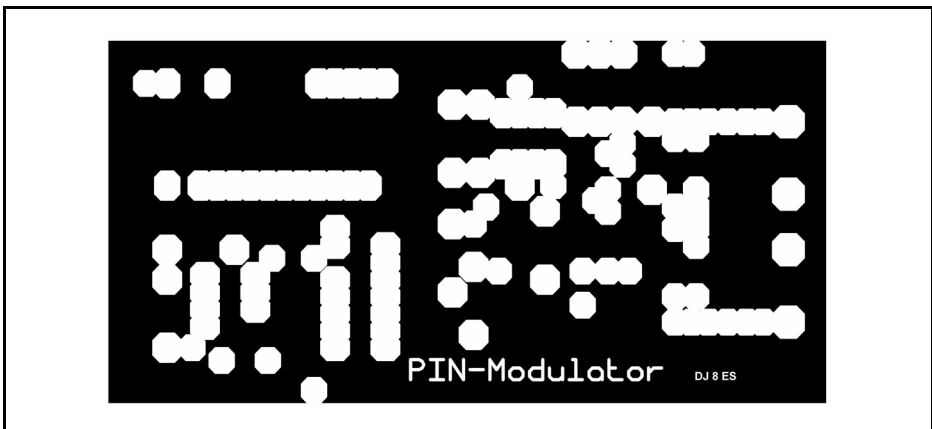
Earth side of CW pin diode modulator printed circuit board.
